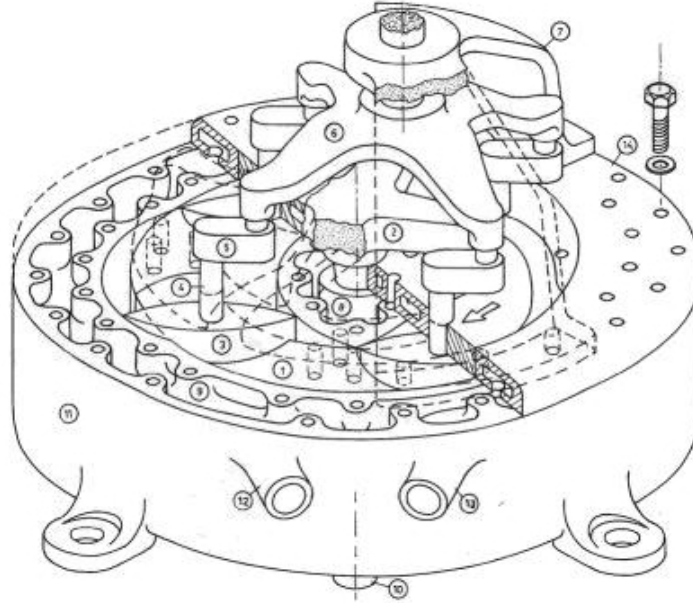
Cutaway drawing of four-vanes MRCVC engine.
